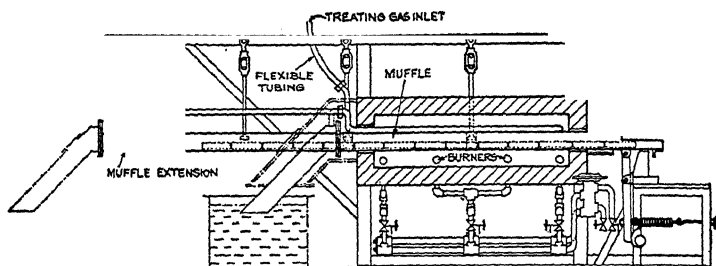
Cross-sectional view of shaker hearth or reciprocating hearth furnace, illustrating construction of hearth.
